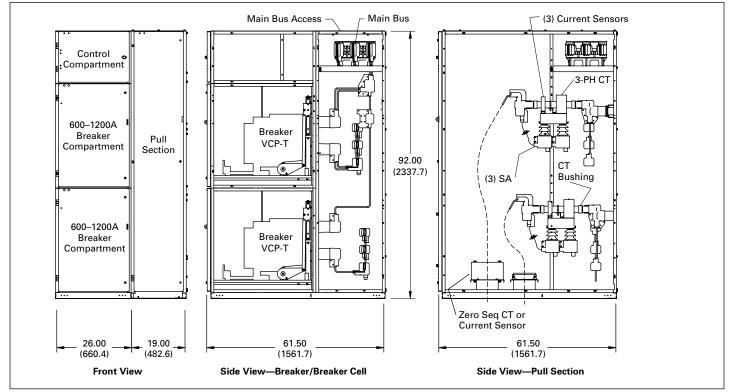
Typical Breaker/Breaker Unit and Pull Section, Cables Out the Bottom
